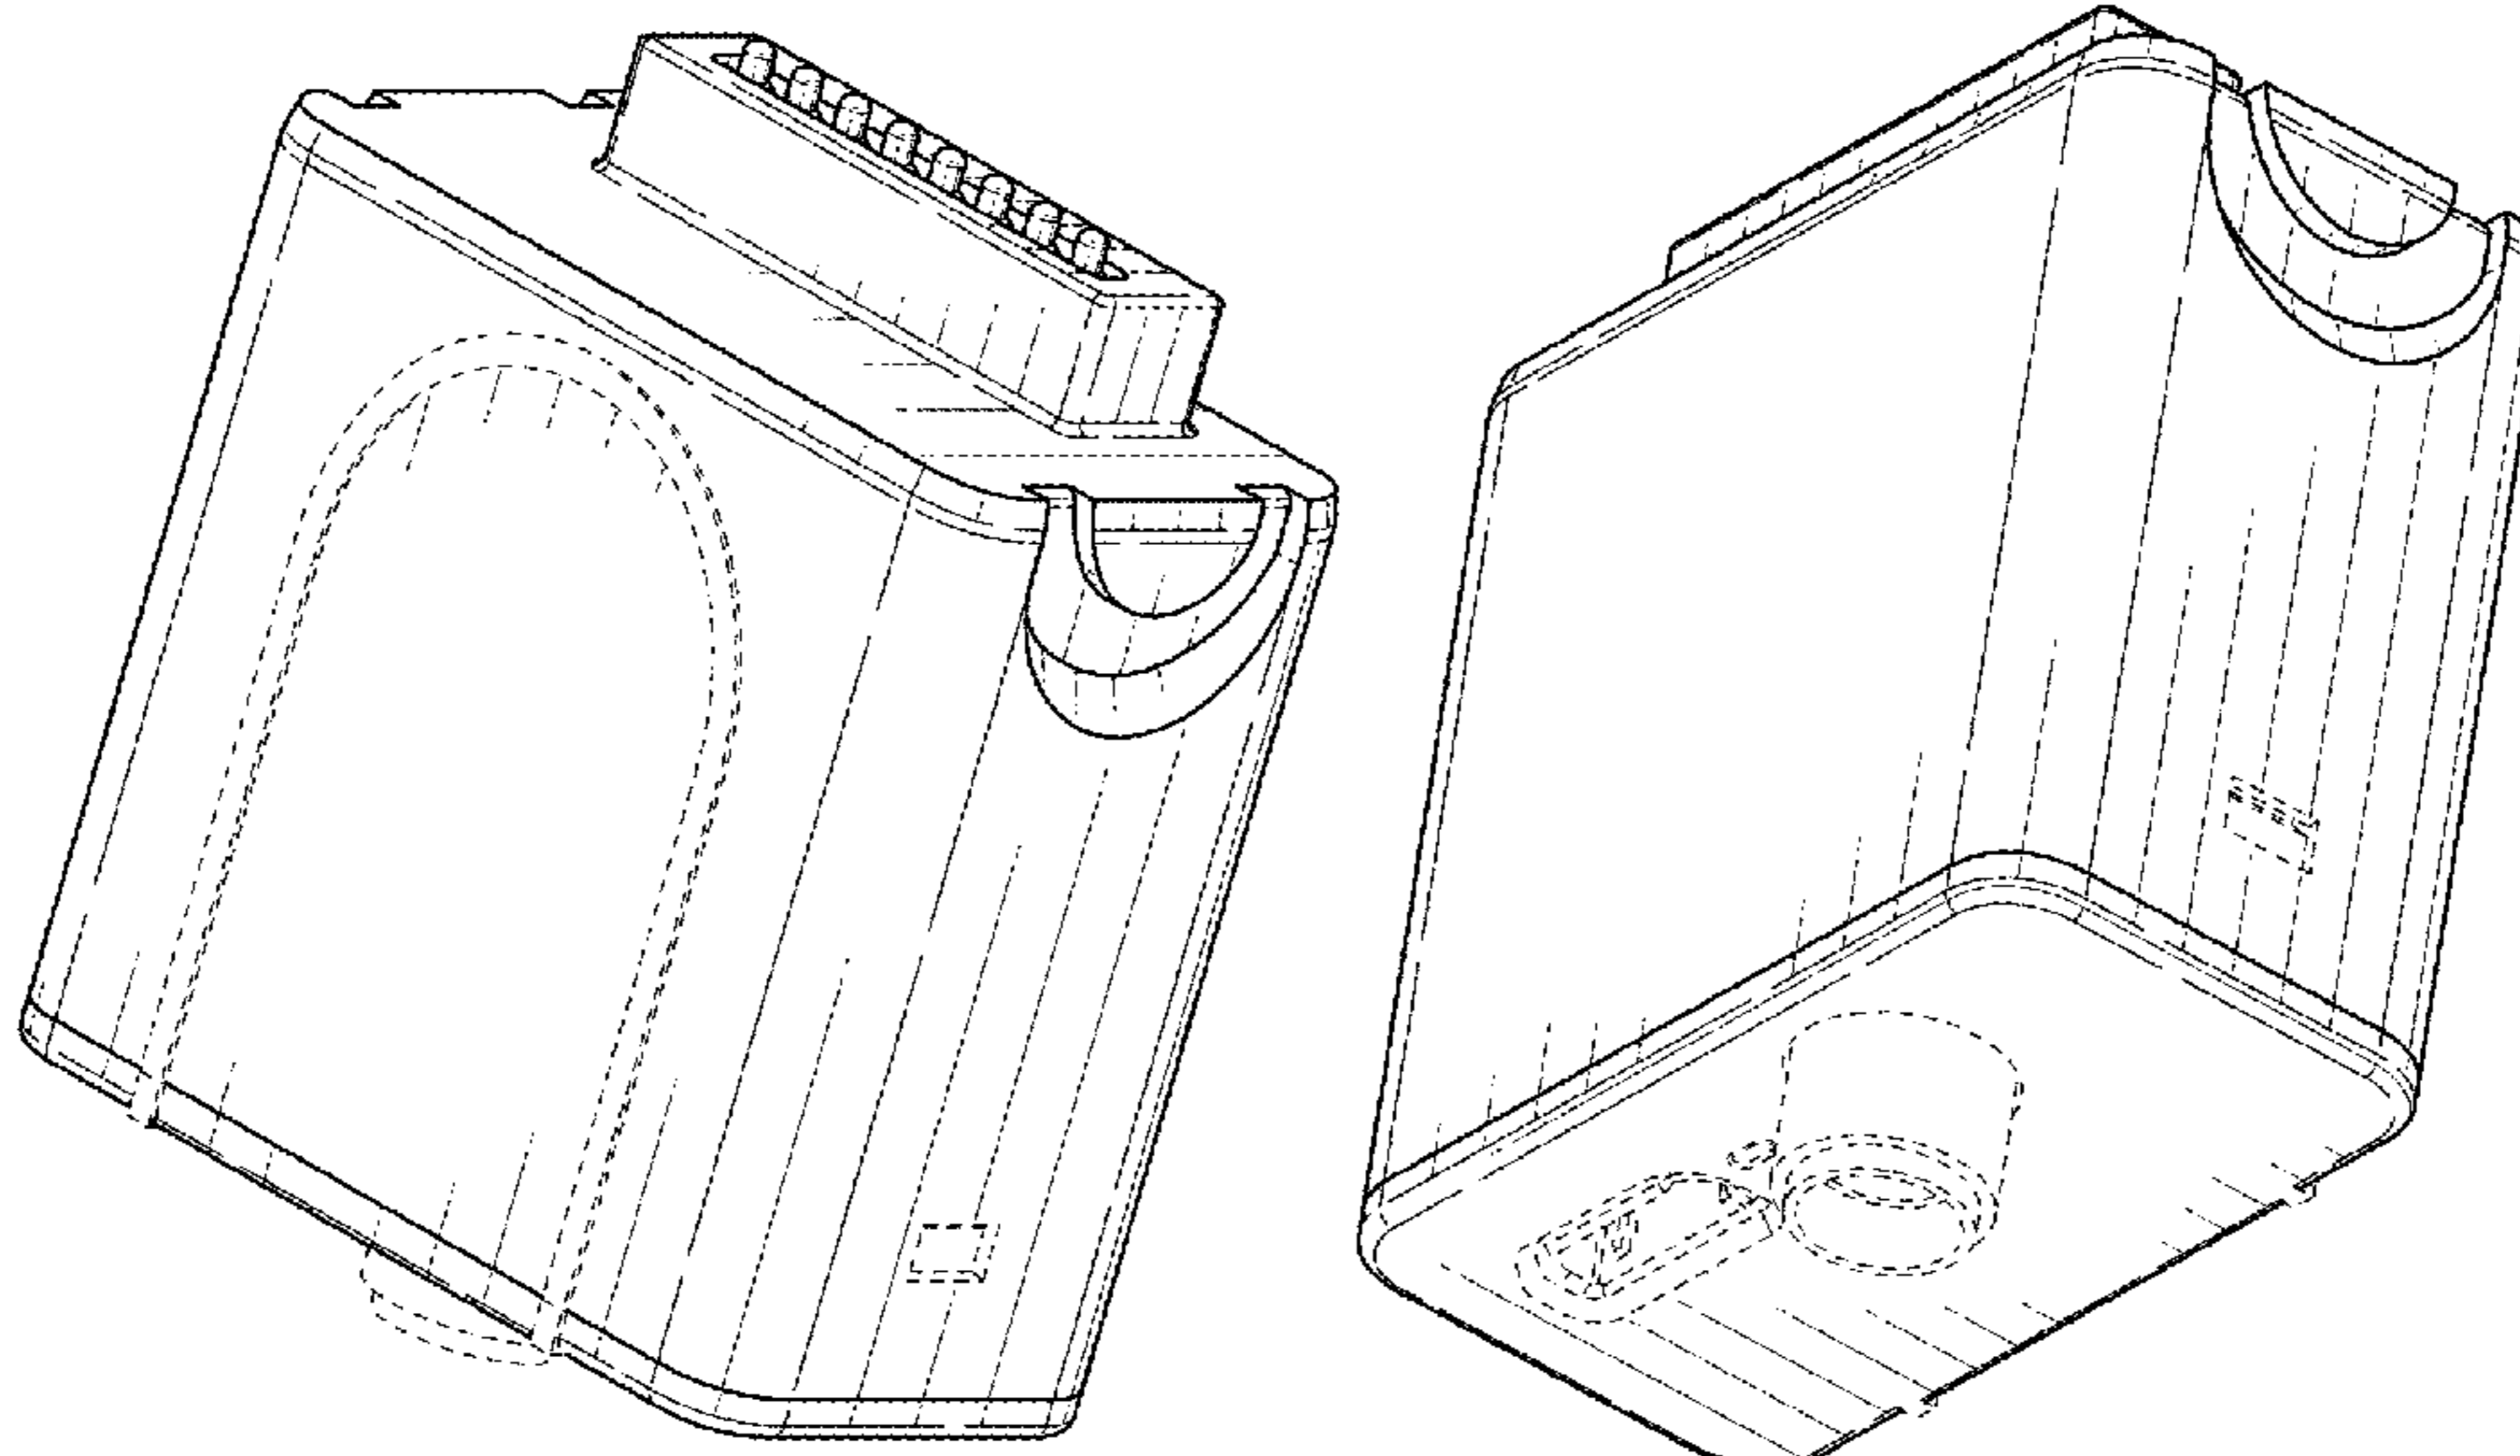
is an exploded front isometric view thereof, shown in environmental use.
